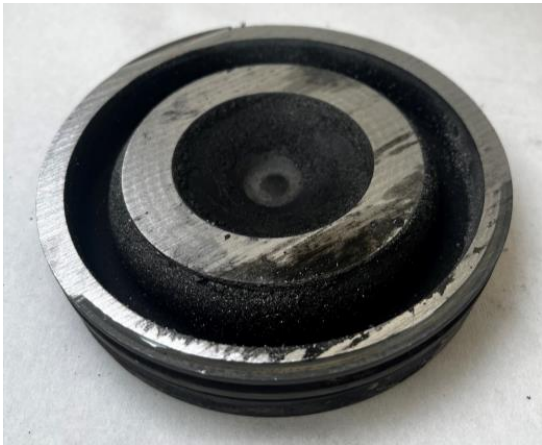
Cross sectional view of piston 14 top part of cooling gallery after cleaning.
